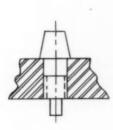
Threaded shank on core with square or flats on extreme end for tightening.
